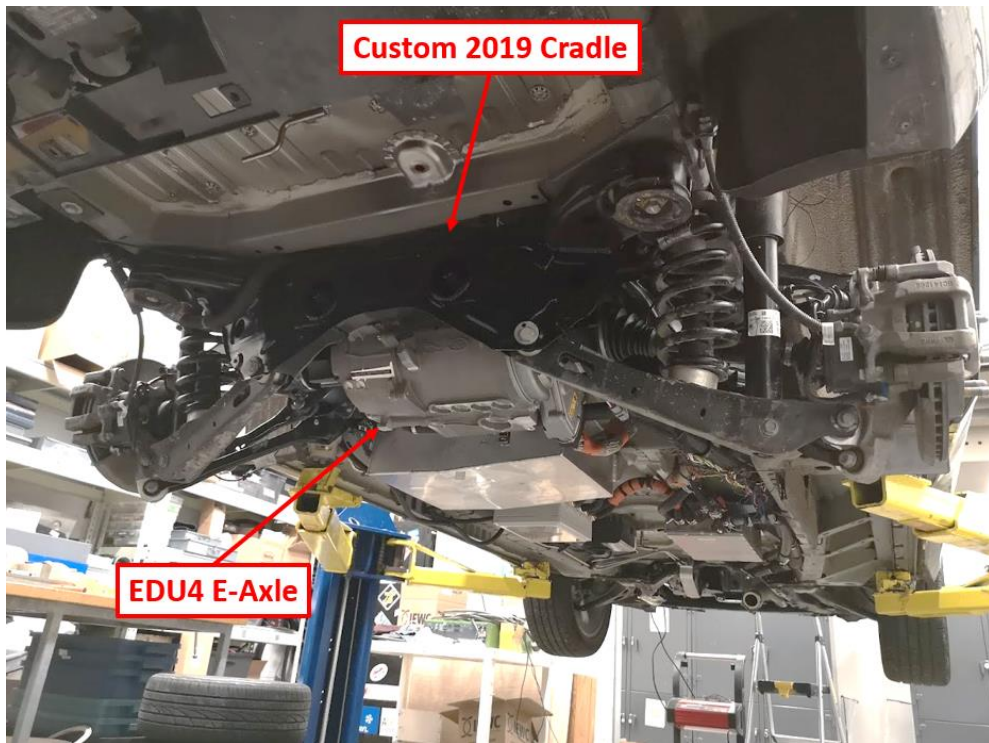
Integrated rear cradle assembly, consisting of the e-axle and all associated components with the 2019 cradle
